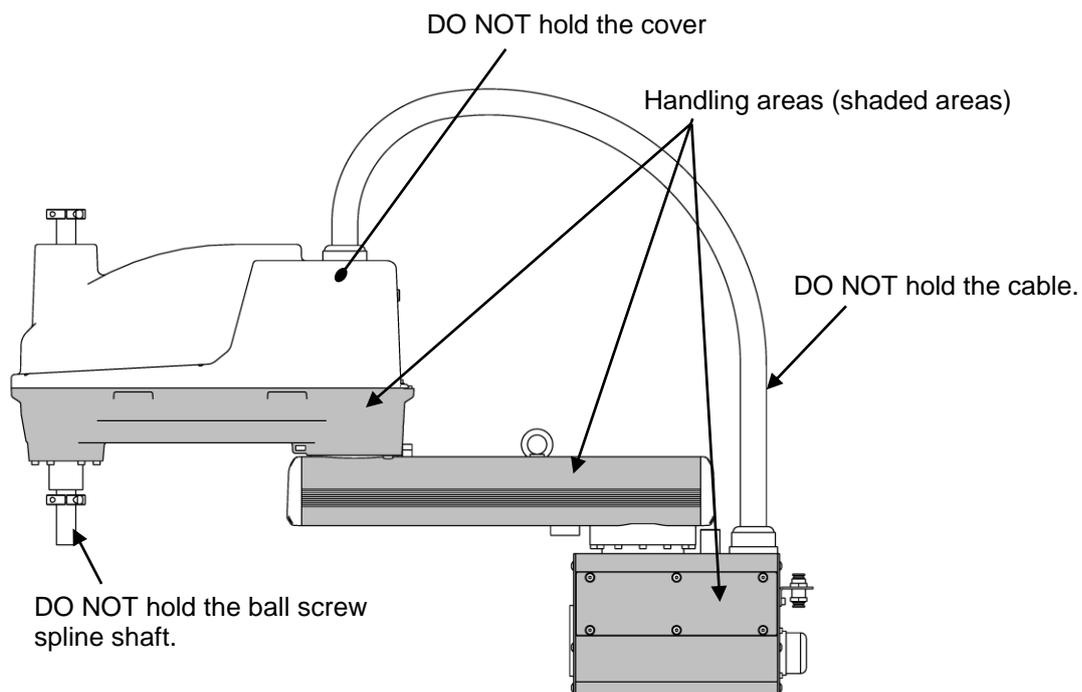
Robot Handling Locations (KHL-500, KHL-600 and KHL-700)
